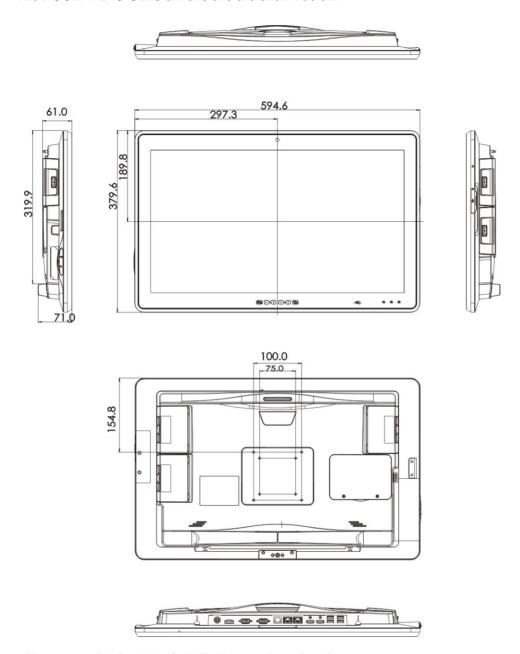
POCm-W24C-ULT3 Dimensions (mm)
